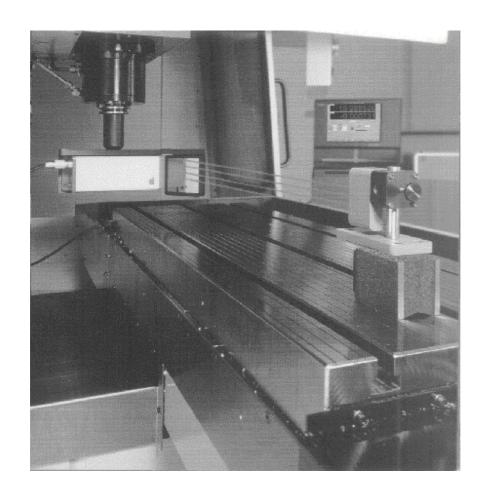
, A DUAL-BEAM LASER HEAD ON A SPINDLE
